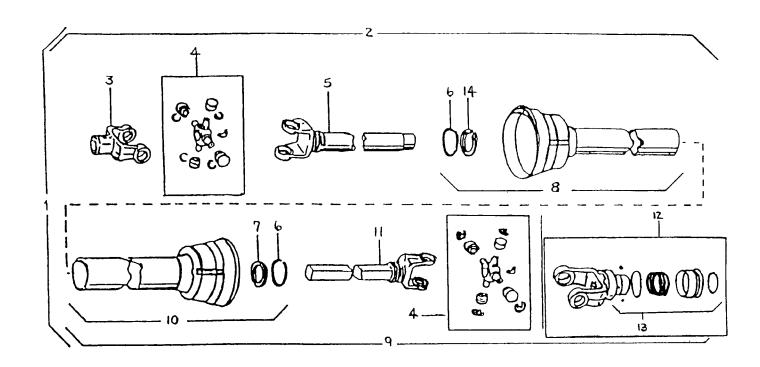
PTO PARTS HD NEEDLE BEARING PTO
